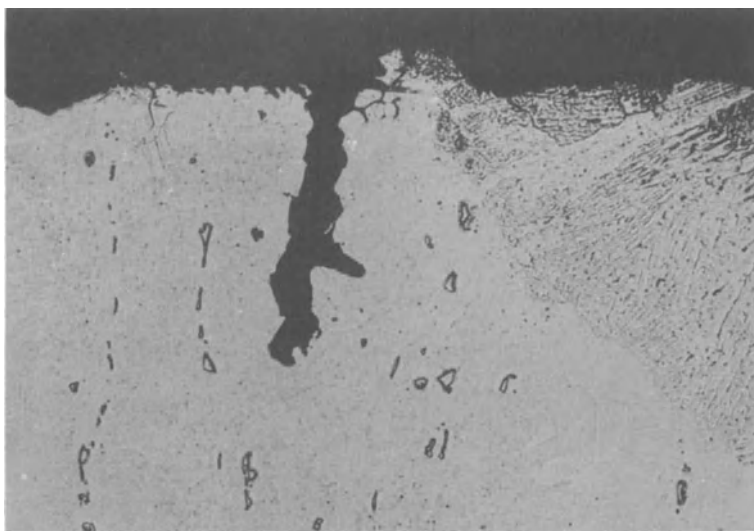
Hot cracking in the heat-affected zone of an austenitic chromium-nickel steel weld. This type of crack occurs during welding ($\times 200$). (Photo: Welding Institute.)
